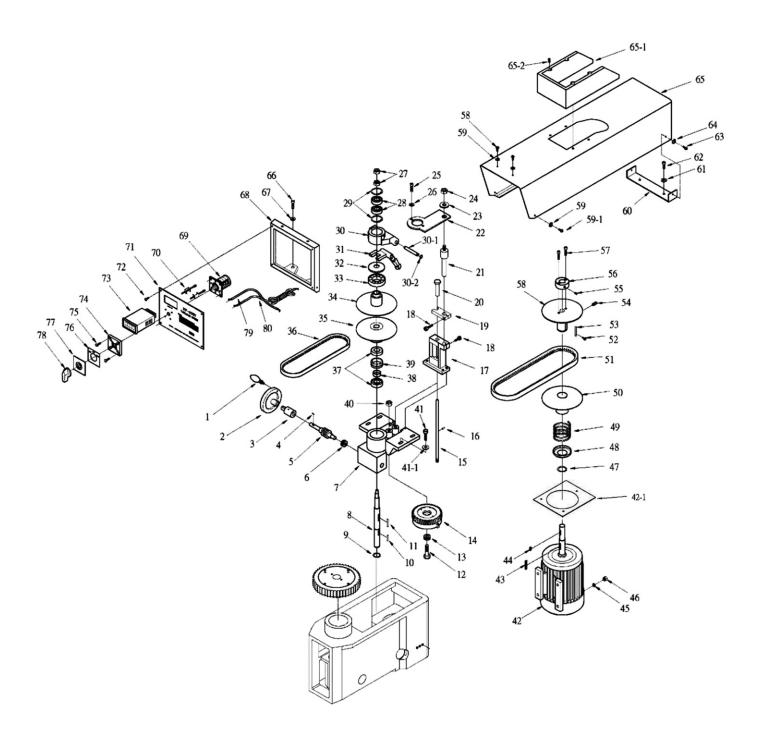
Replacement Parts Illustration for Motor-Pulley Assembly
